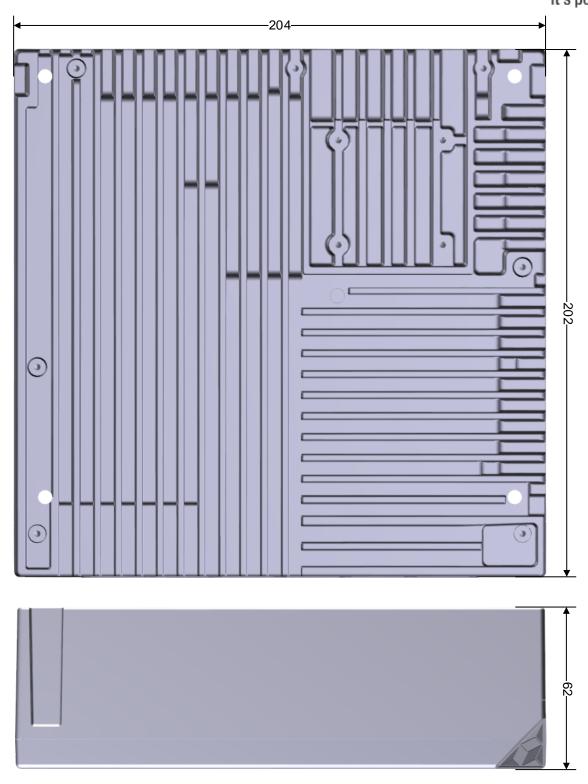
Mechanical outline of the bounding box (dimensions in mm)
